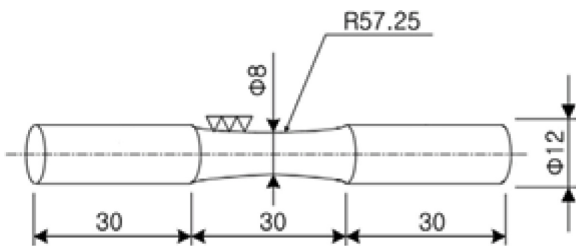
Rotary bending fatigue test specimen (unit : mm)
